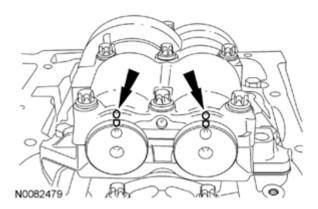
Locating Balancer Unit And Shafts Marking Courtesy of FORD MOTOR CO.
